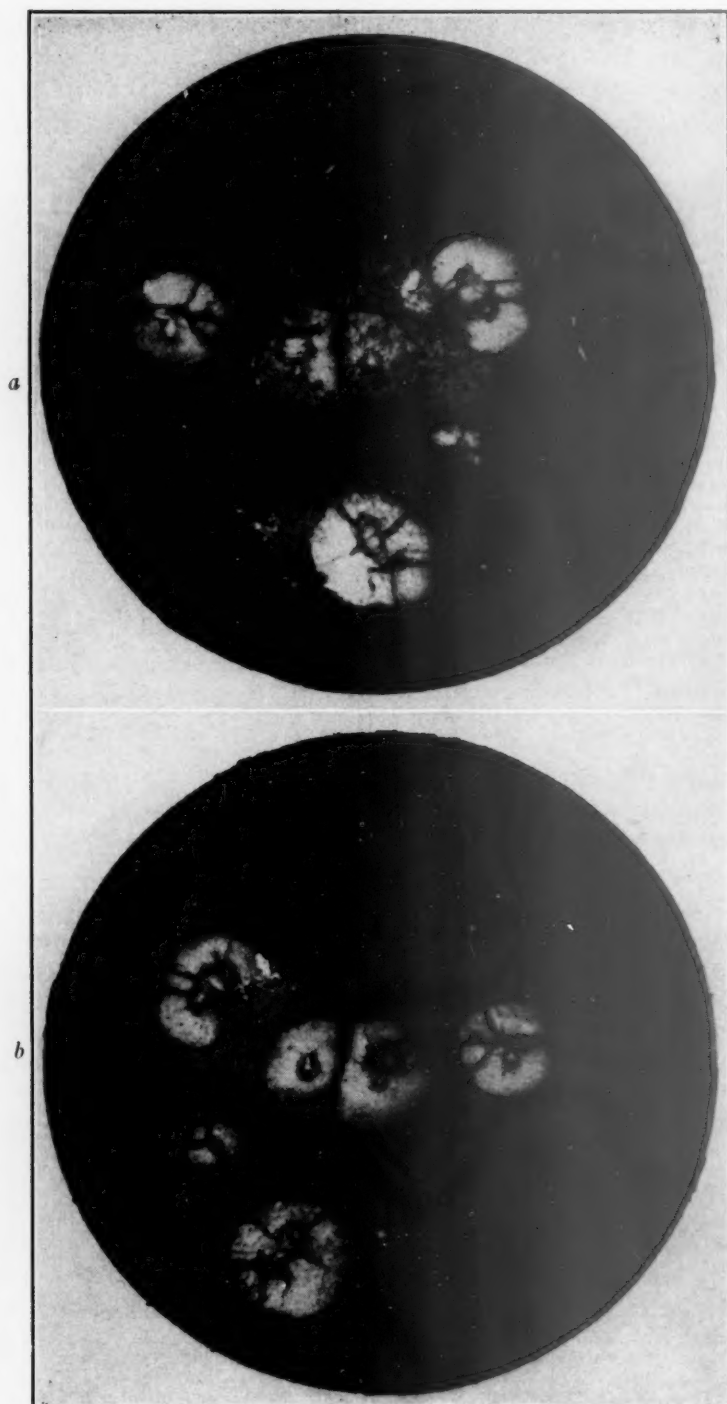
“FISHEYES” IN TENSILE FRACTURE OF WELD METAL. $\times 3$.
